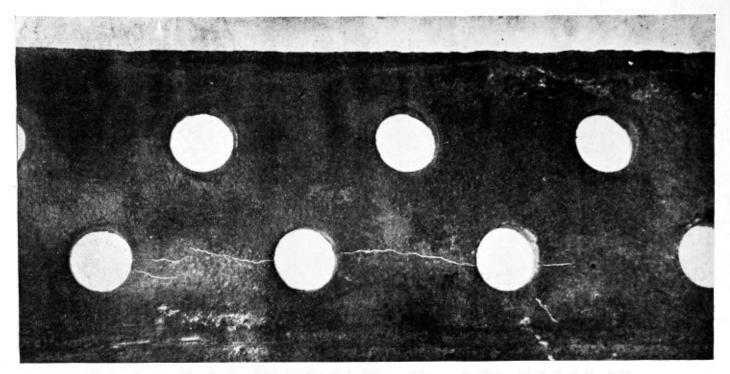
Fracture Through Rivet Holes in Longitudinal Seam of Locomotive Boiler, South Australian Railway
